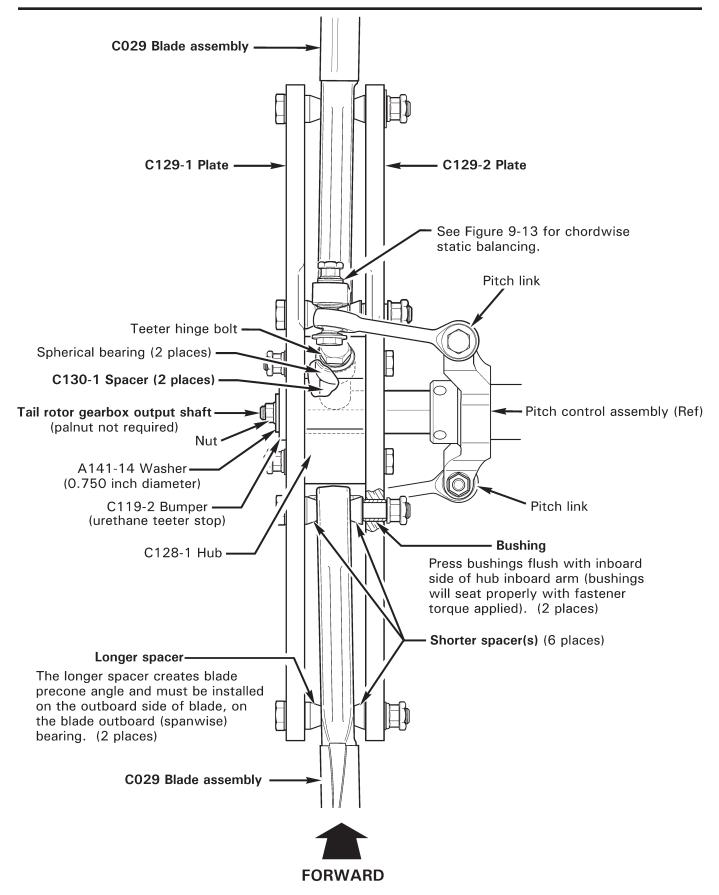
THREE-PIECE HUB TAIL ROTOR ASSEMBLY INSTALLATION
